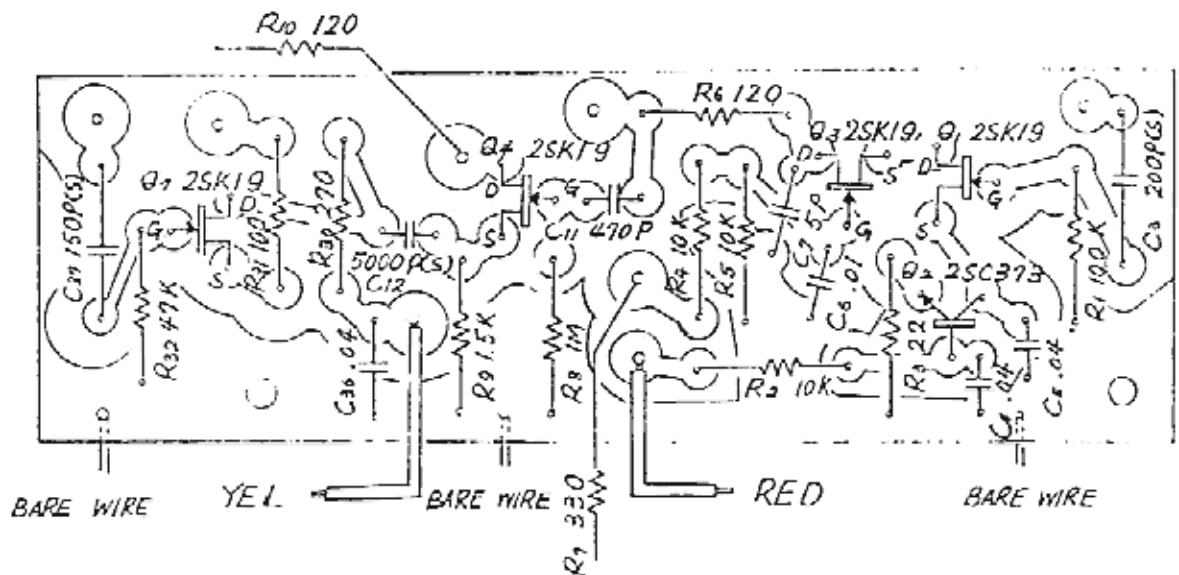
SUB PRINTED CIRCUIT BOARD REAR VIEW
